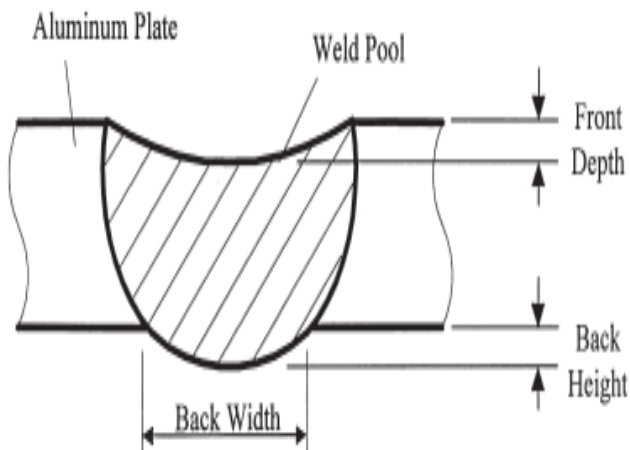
Aluminium thin plate weld pool geometry
